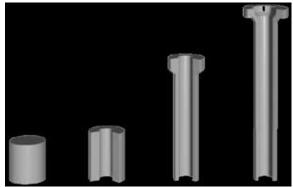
Hollow Forging Hollow Transmission Shaft •Hollow shaft for double clutch transmission •Manufacturing sequence includes
